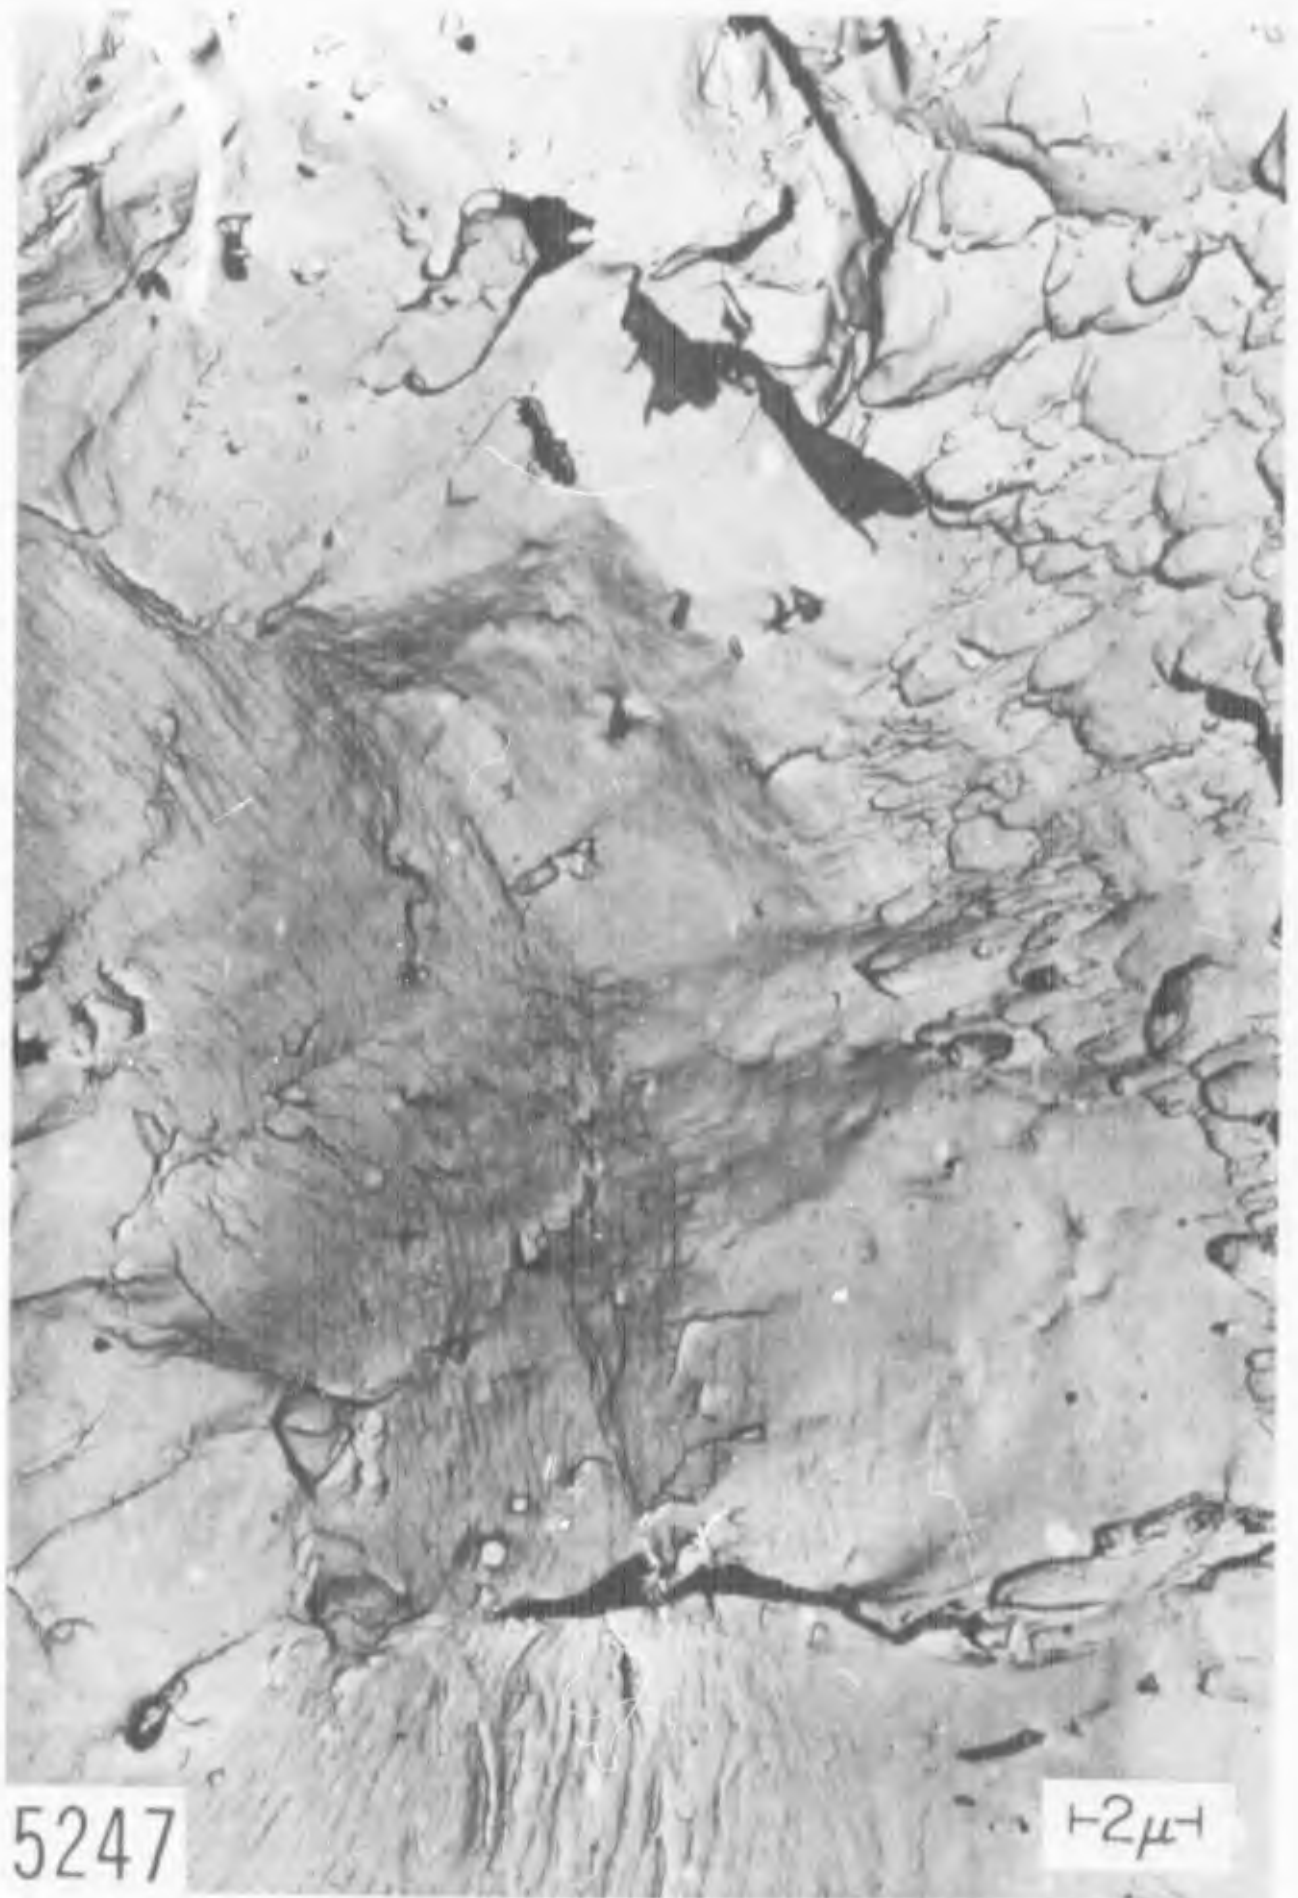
Another view of the intersection of a stress-raising fatigue crack with the monotonic fracture. Fatigue may be seen to the lower left. Stretching is followed by tearing during the test. Palladium-shadowed two-stage carbon replica. 9000X.
